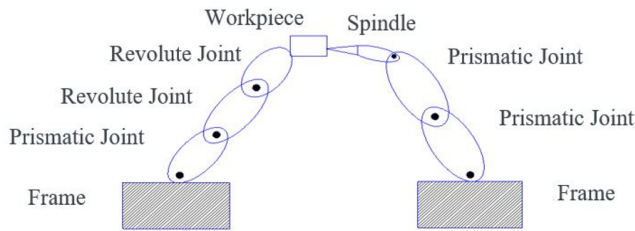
Kinematic chain diagram of 5-axis milling machine tool
